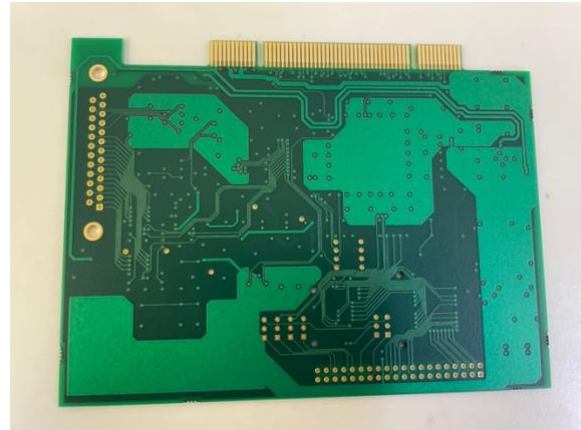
Custom-made PCB with dimensions 142 x 102 x 1,55mm bottom surface layer (Layer 4)
